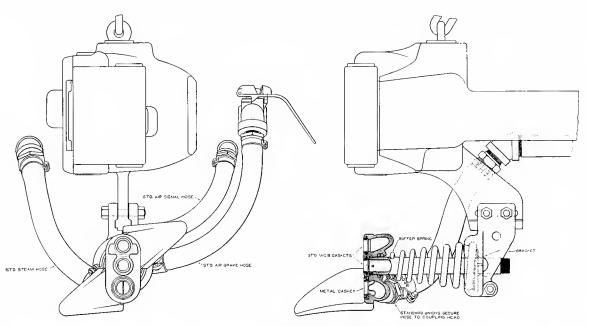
Robinson Automatic Coupler for Air Brake, Signal and Steam Heat Pipes. Robinson Coupler Company.
